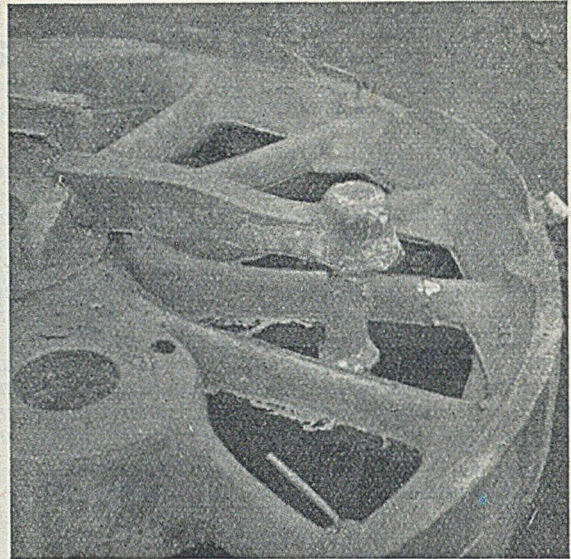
Example of Bottom Gating employed on a Steel Driving-wheel Casting.
